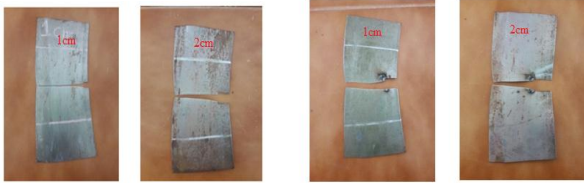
1cm, 2cm crack and 1cm and 2cm crack with weld after testing
